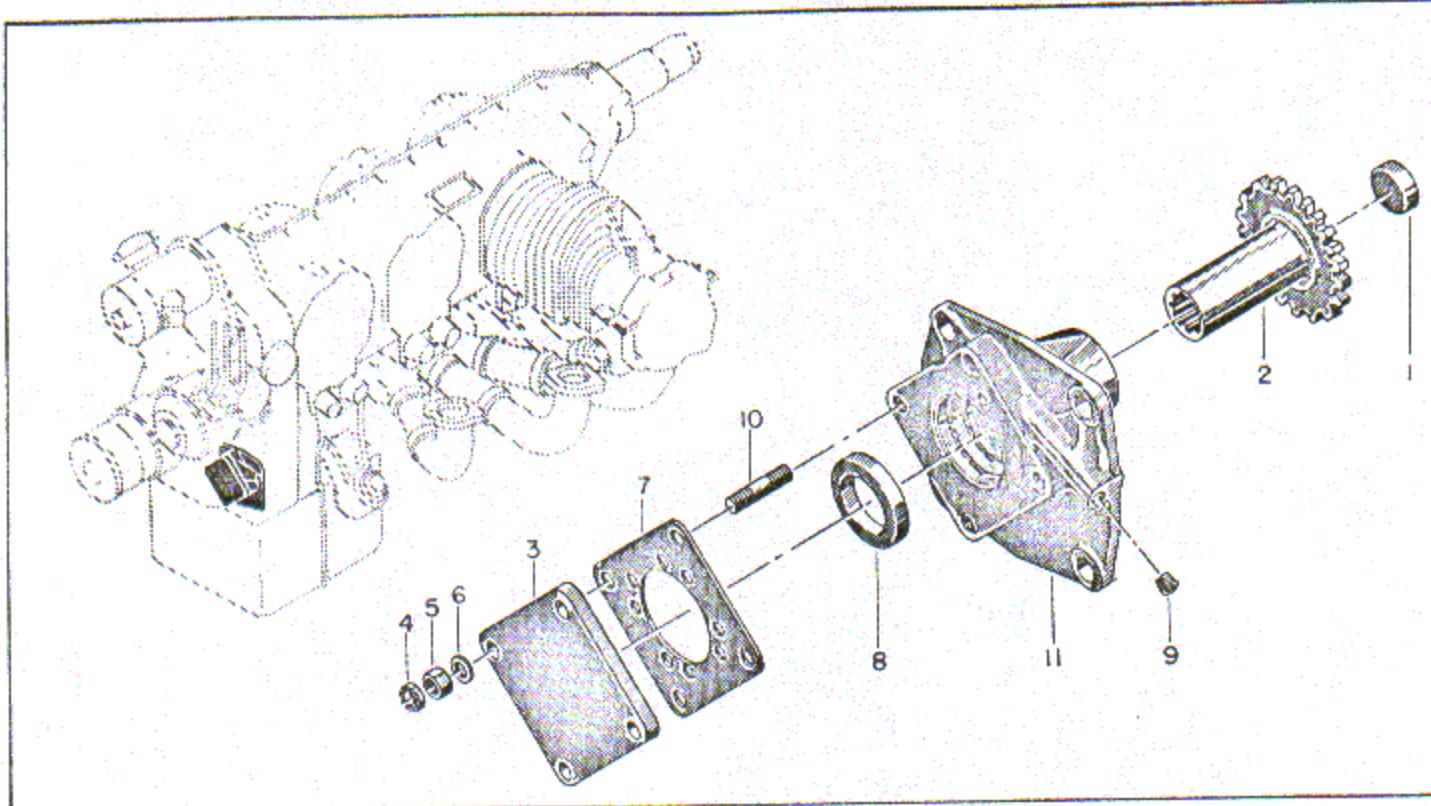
Exploded Parts View of O-470-7 Right Side Accessory Drive Assembly
